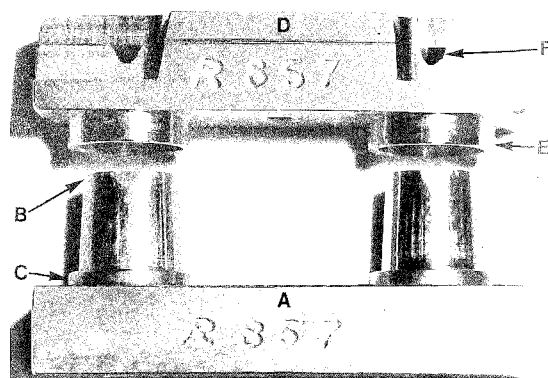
Components of metal die and gauge block: A — base of die; B — taper cylinder of master die; C — ferrule of master die; D — base of gauge block; E — ferrule of gauge block; F — measuring window of gauge block.
